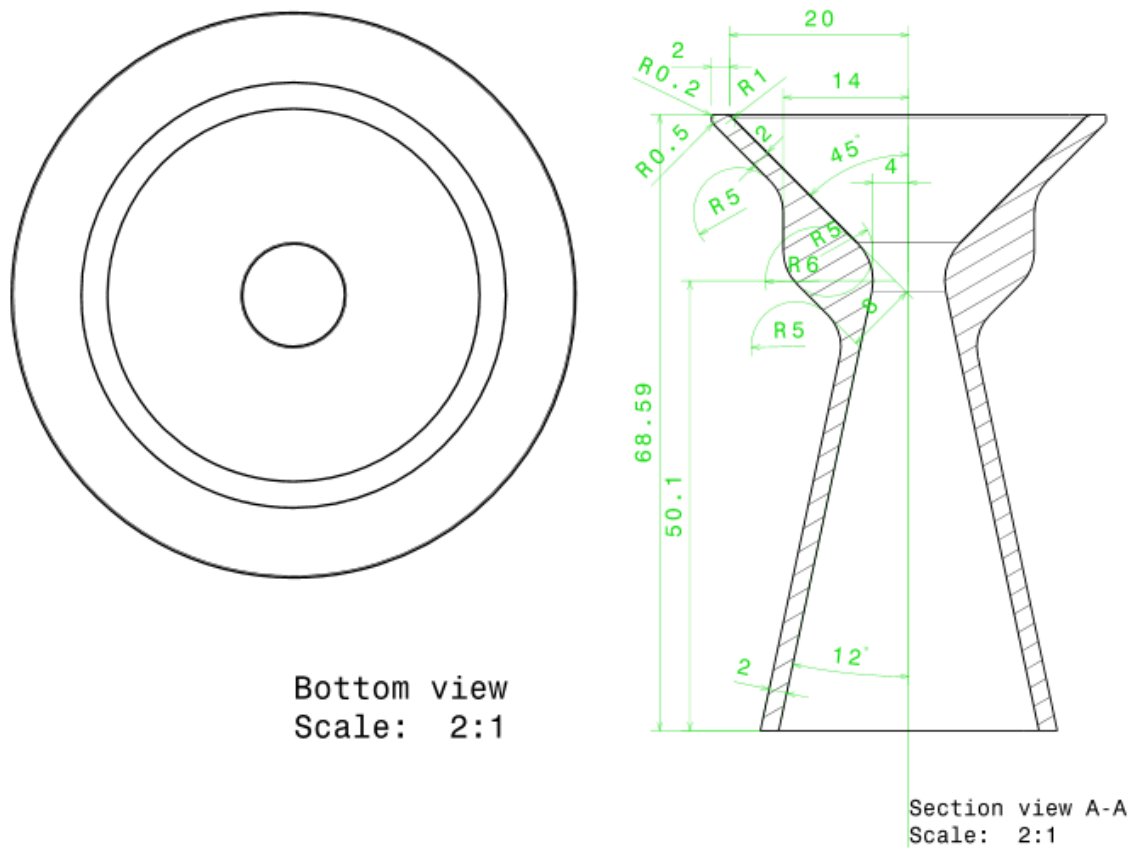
a) Nozzle front view and b) Nozzle top view of nozzle
